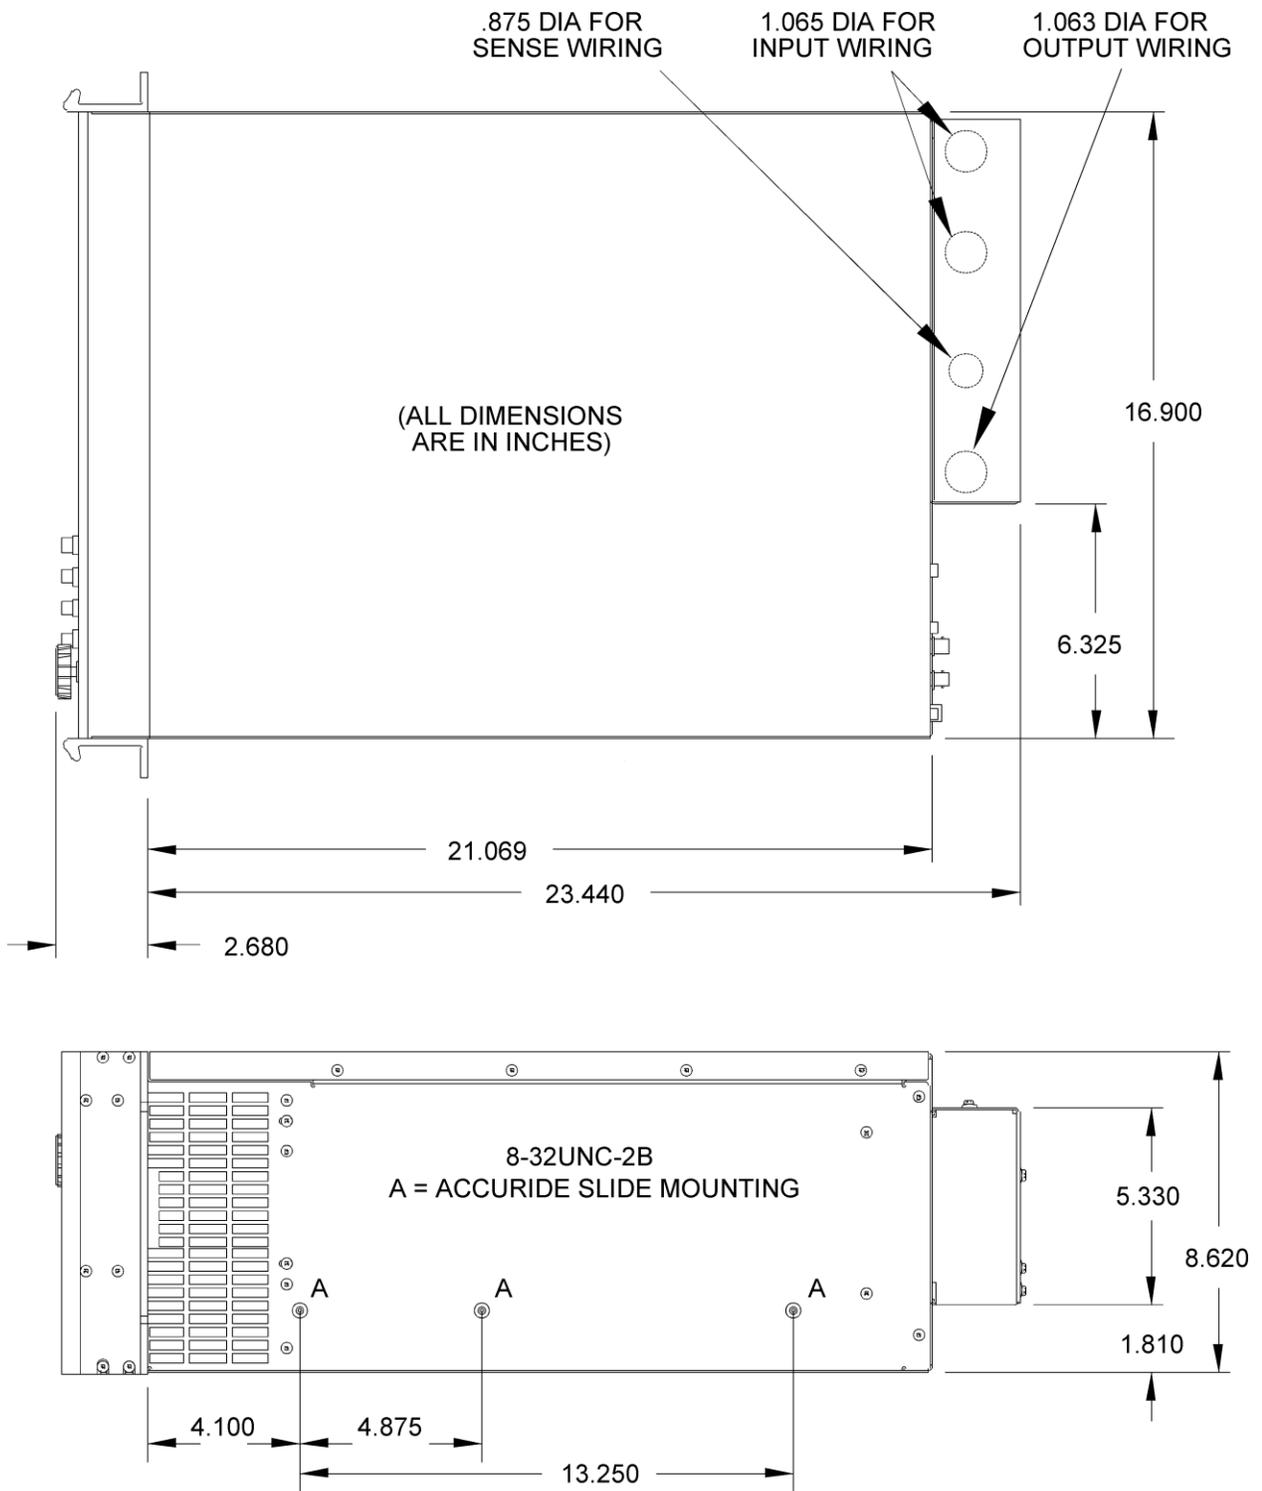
Mounting Dimensions, SmartWave Top and Side Views
